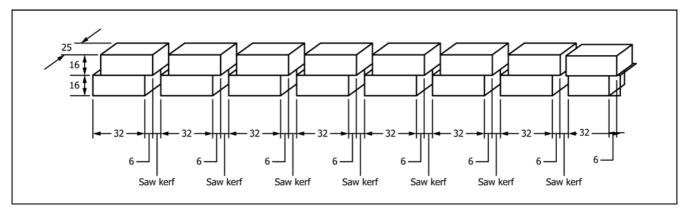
Creep Test Shear Block Assembly Dimensions, mm
